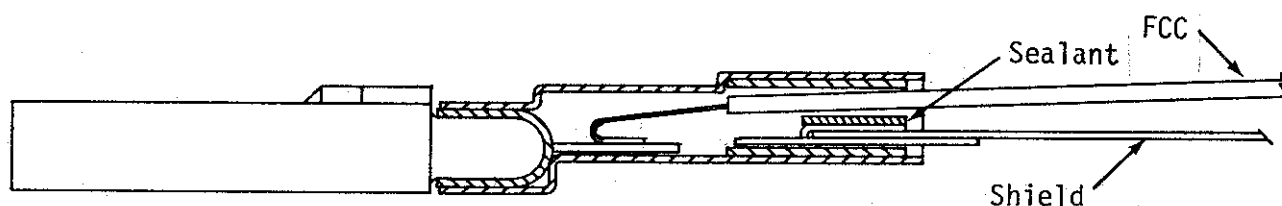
CTA-0055 Sealant Inserted Between FCC and Shield (Shield Below)
